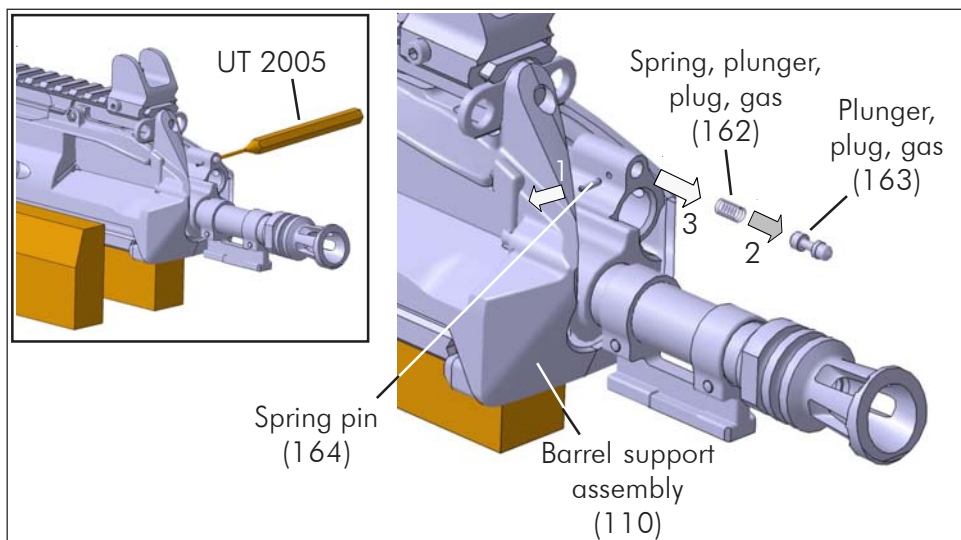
k - Removal of the plunger, plug, gas (163)
